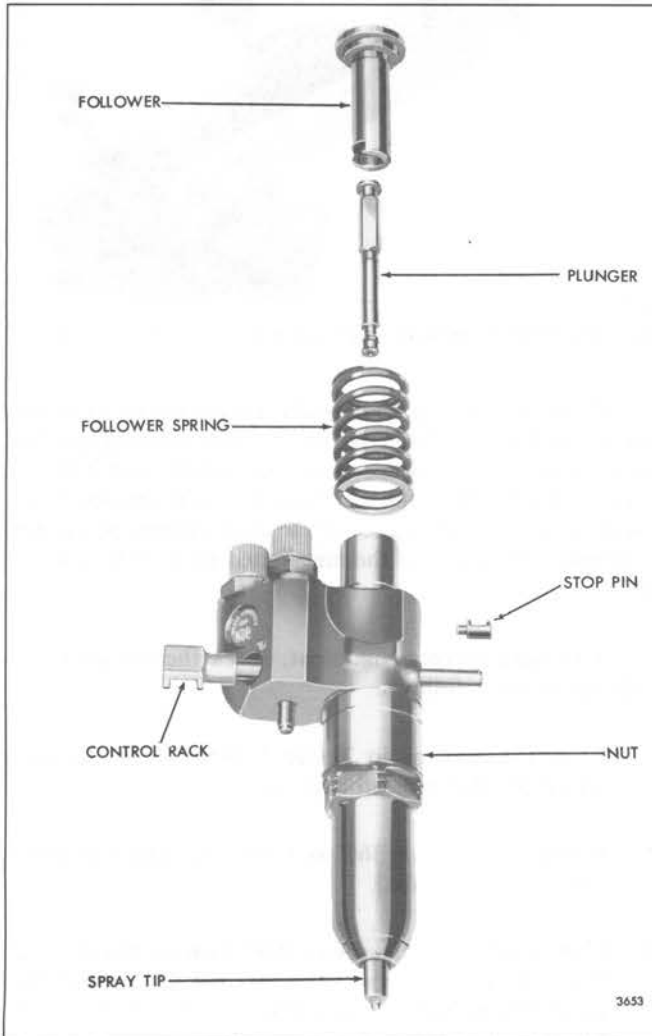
Injector Plunger, Follower and Relative Location of Parts
